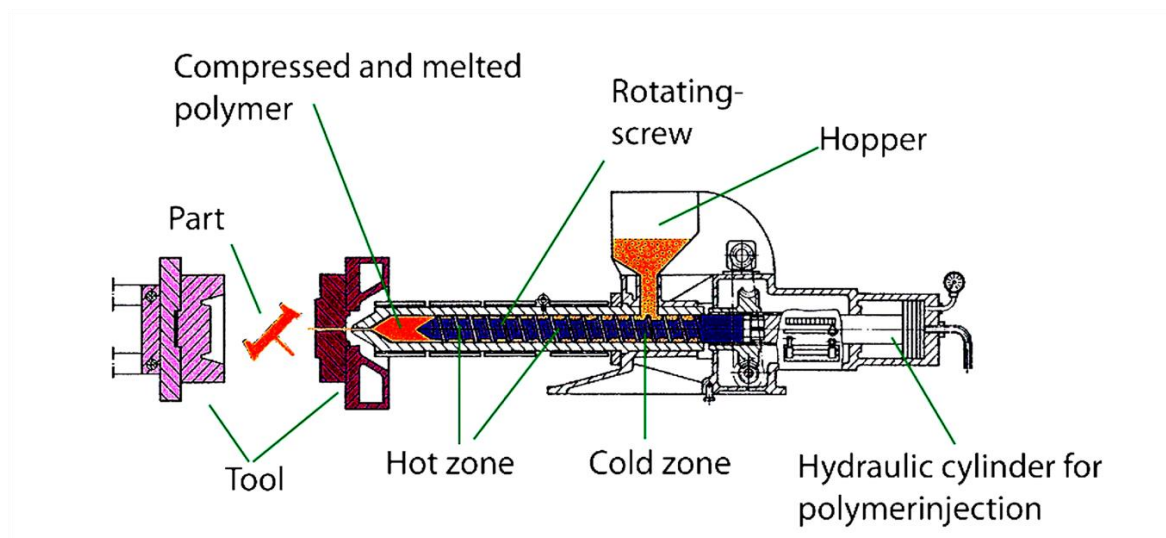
Schematically drawing of injection molding machine. Modified from⁸¹.
